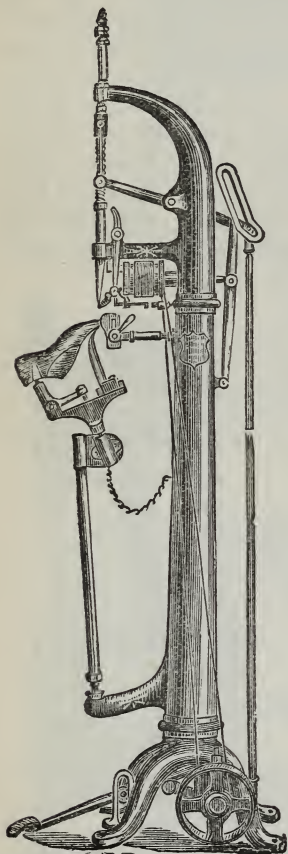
PATENT MAGNETIC LASTING MACHINE.
